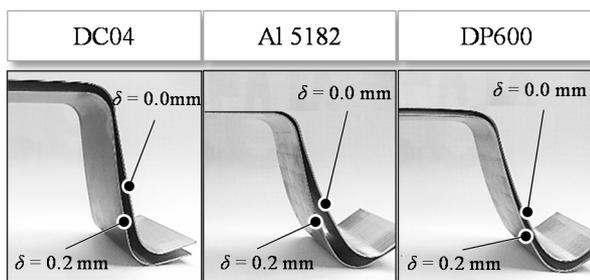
Springback behaviour of workpieces with and without alternating bending.
